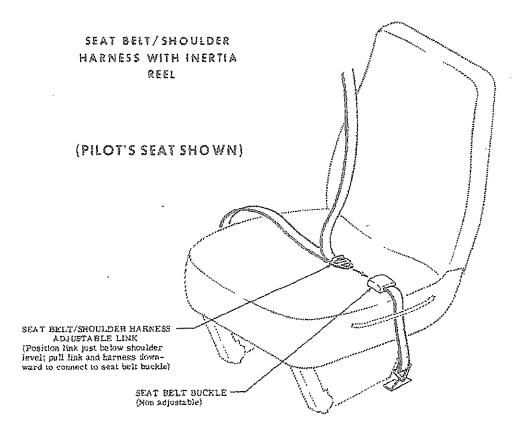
Seat Belts and Shoulder Harnesses (Sheet 2 of 2)
